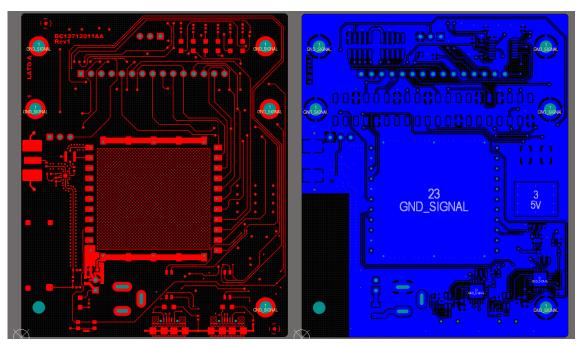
Evaluation Board Front and Backside(flipped) Layout
